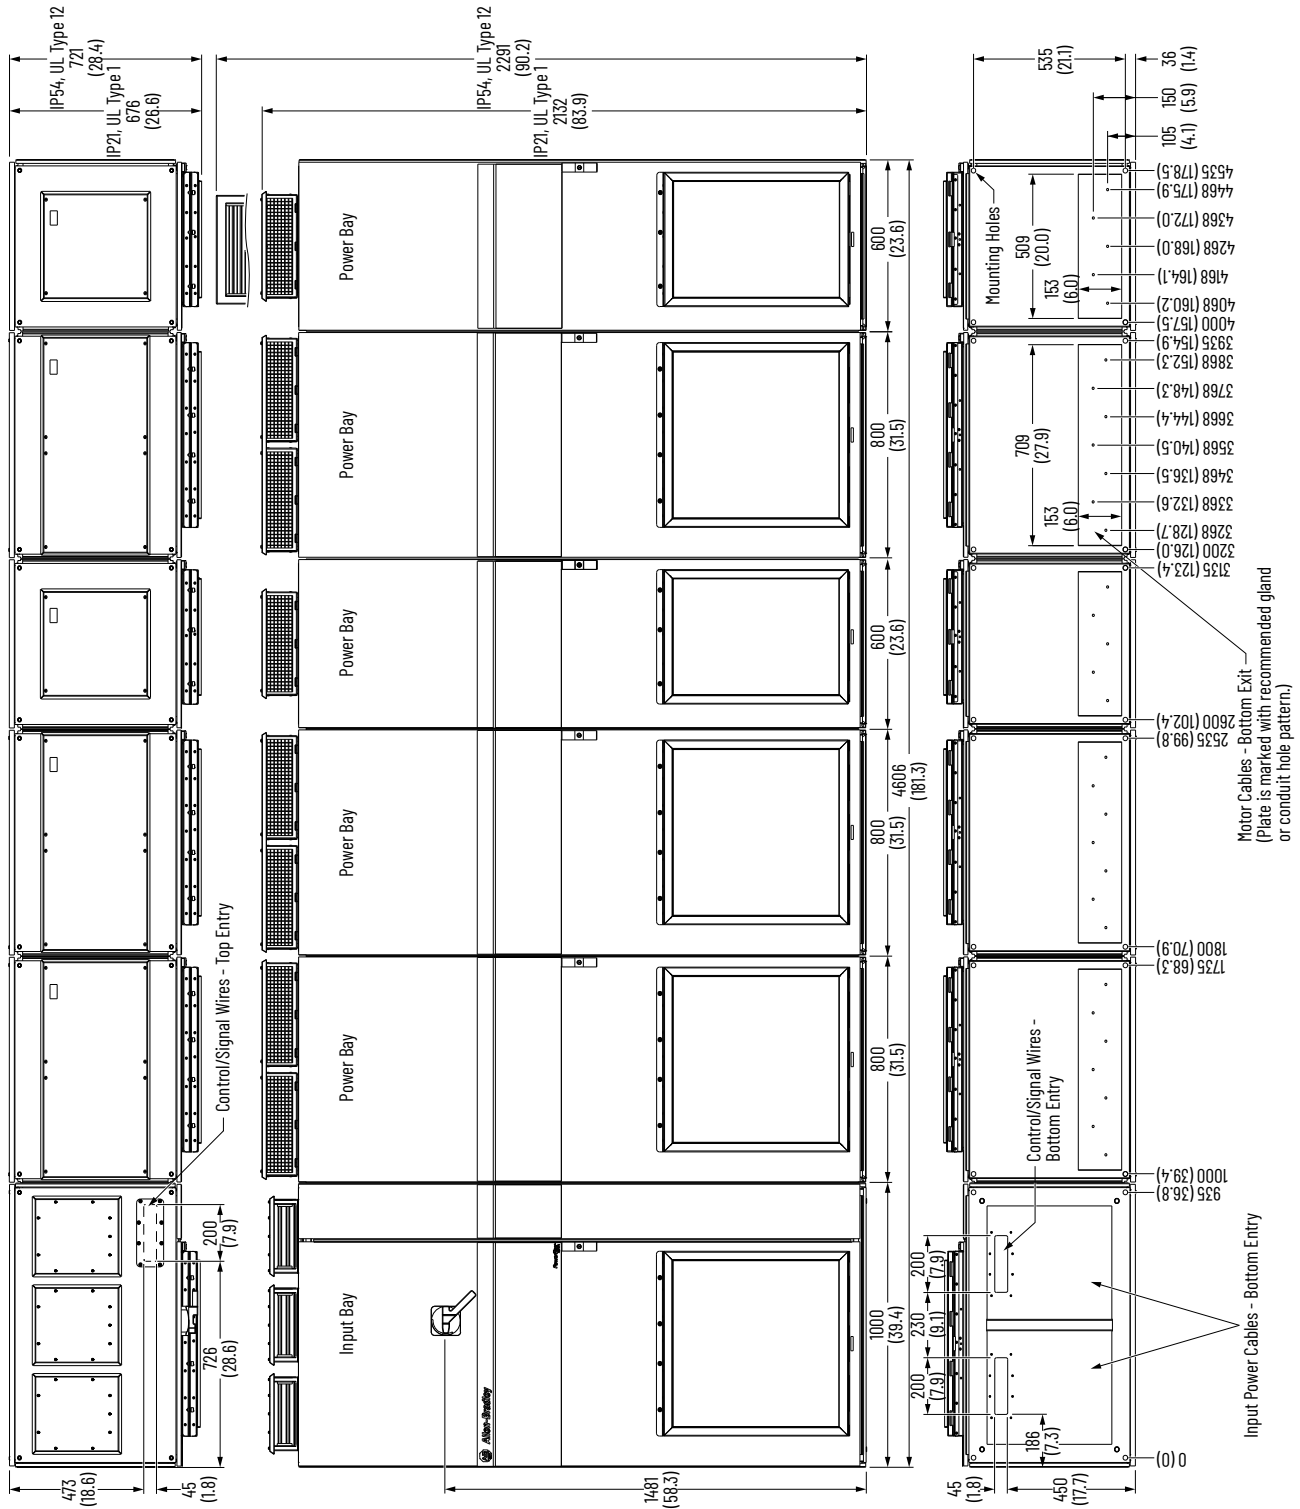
Frame 11 Drives—Top, Front, and Bottom Views—Dimensions are in mm (in.)
